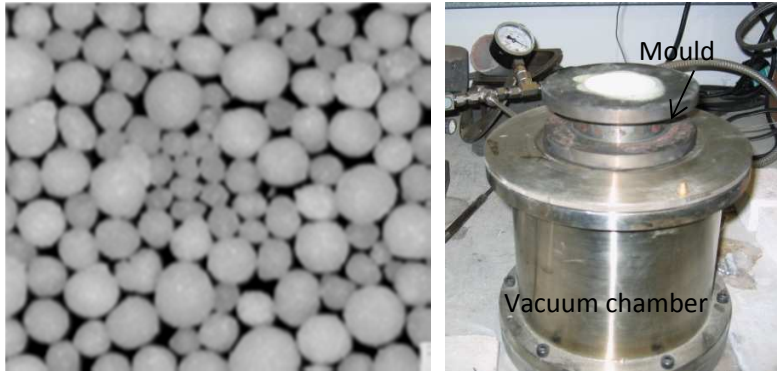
Left, 2.0-2.5 mm salt beads, right, vacuum casting chamber containing the mould
